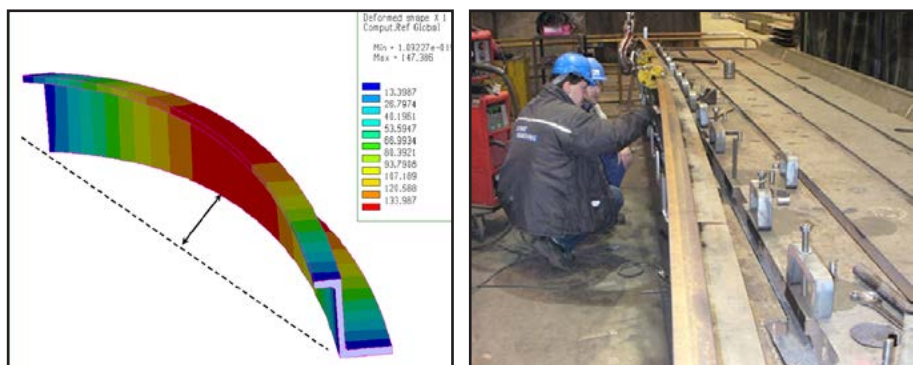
Post weld strains – calculations performed in SYSWELD (left) and actual welded element (right)
